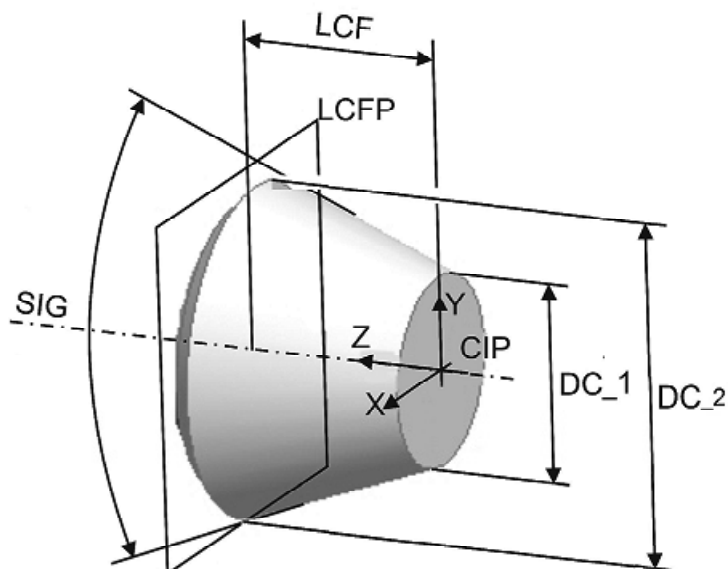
Tapered countersinking tool — Revolved body of cutting part
